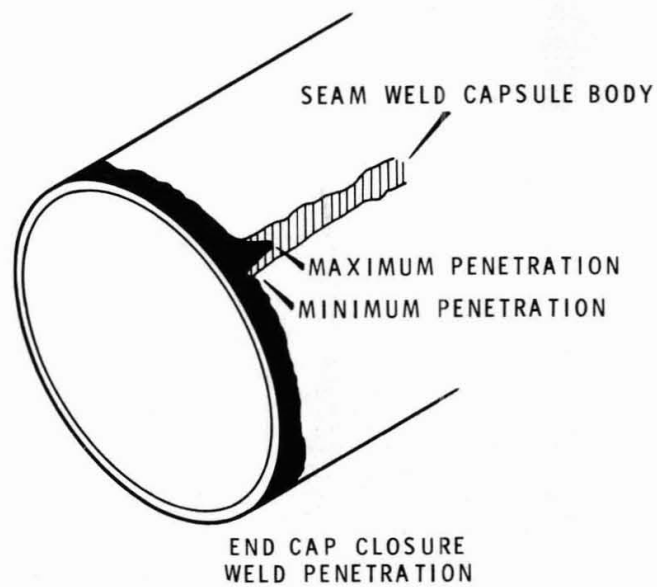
Extreme closure weld penetration changes in seam weld area on Phase II SNAP-21 capsule
